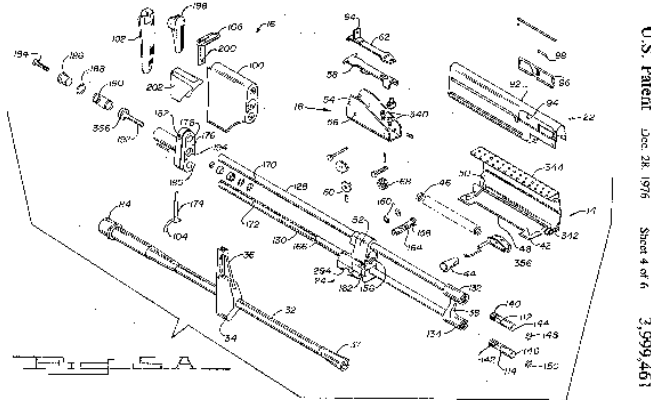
EXPLODED VIEW OF MODULAR LIGHTWEIGHT SQUAD AUTOMATIC WEAPON.
